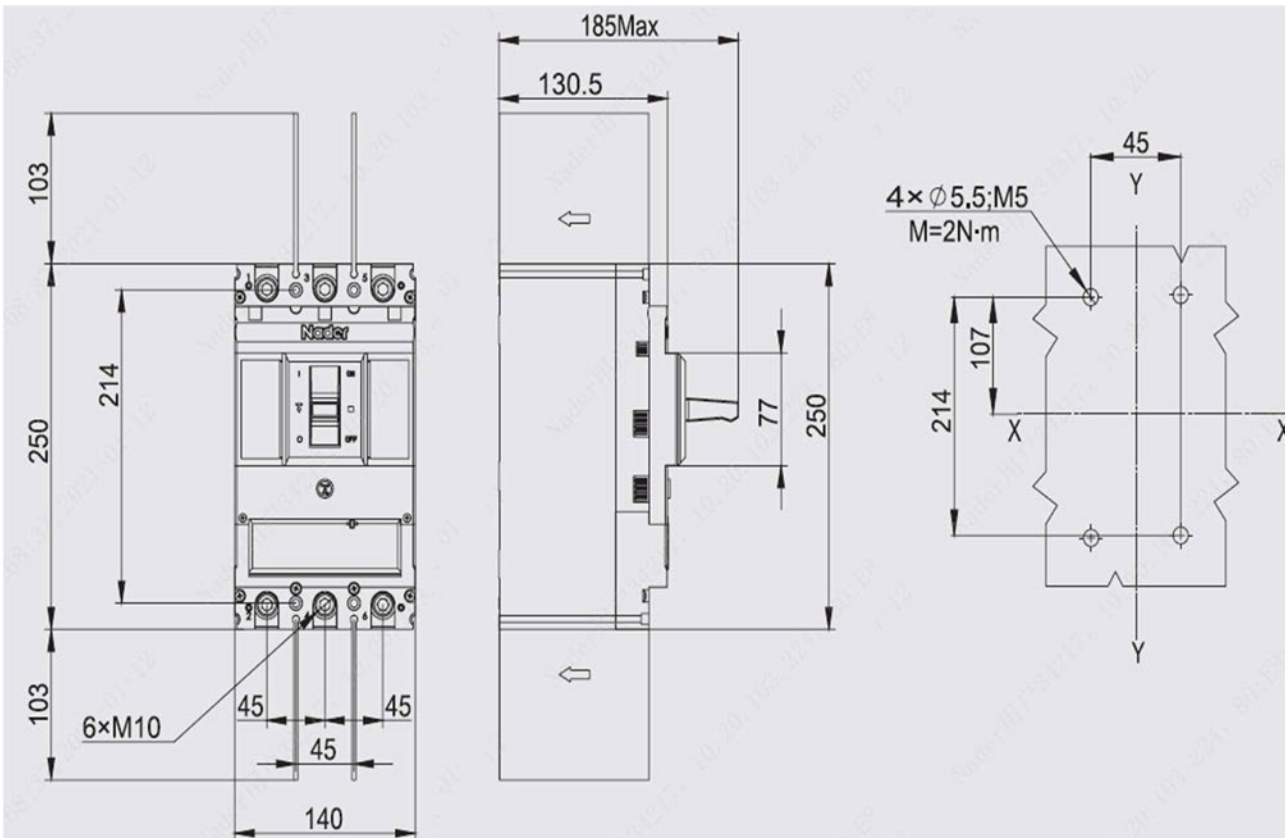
NDM5-400/630U/R 3P 4P Installation dimension drawing of front board wiring products
